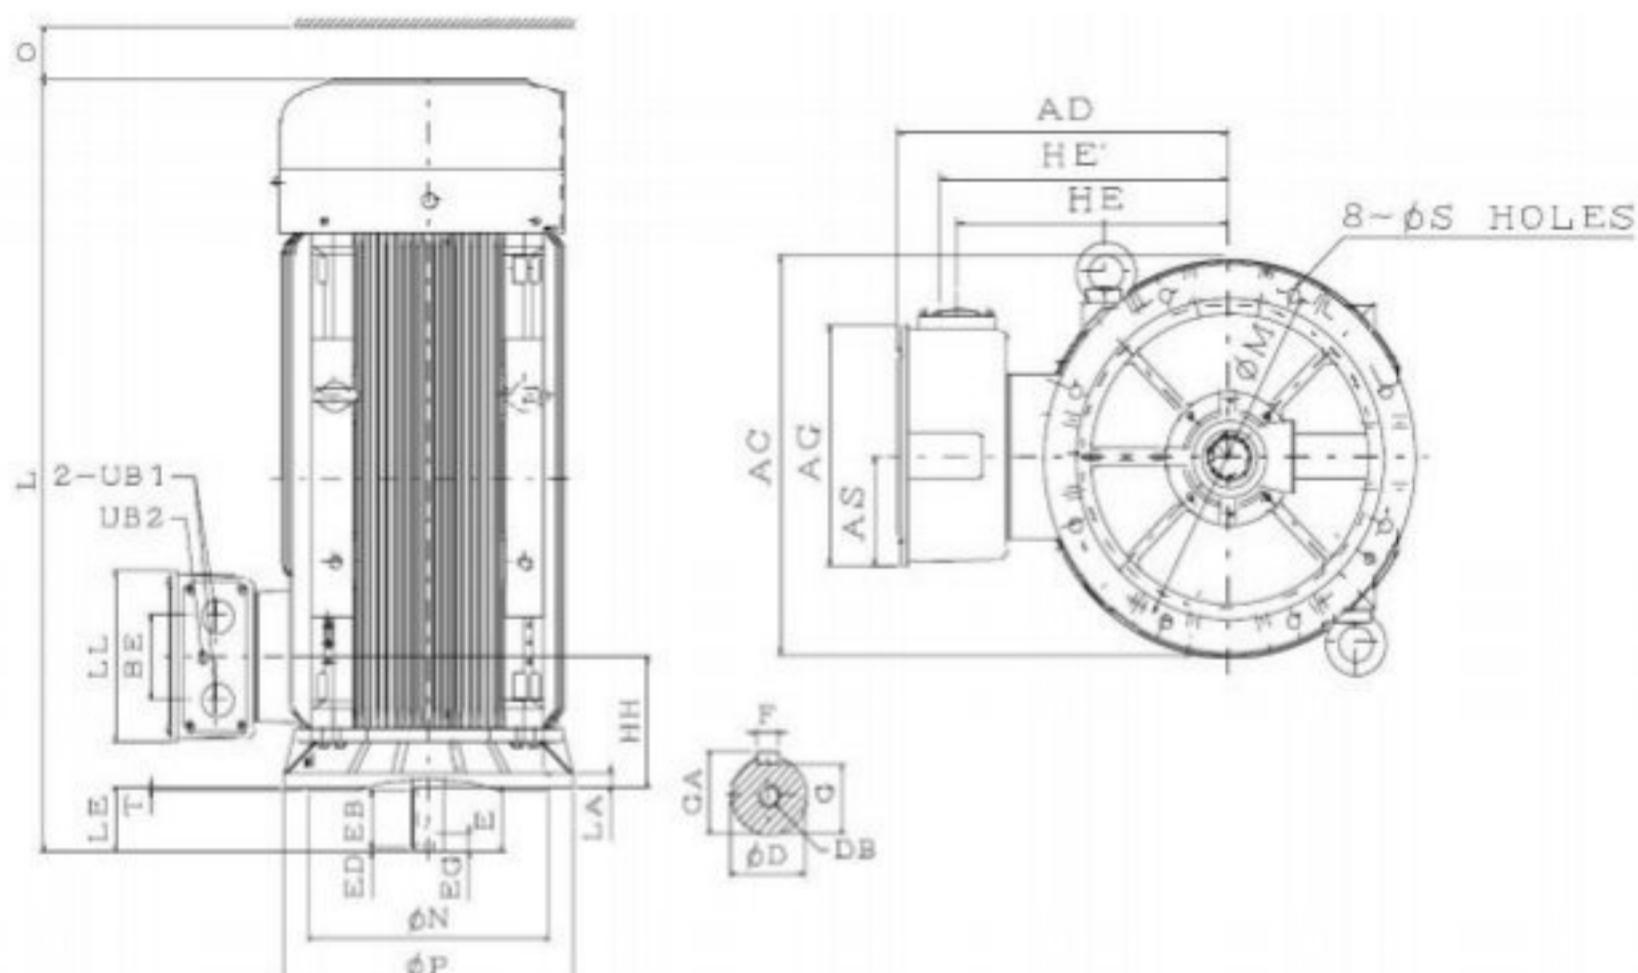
Outline drawing of cast iron design, mounting V1; frame size 315D
